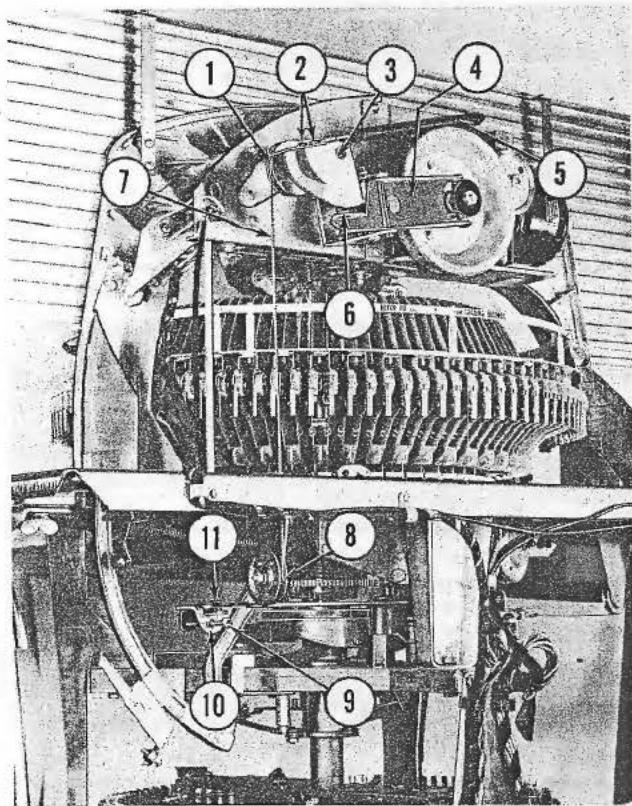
ACTUATING ARM AND CABLE ADJUSTMENT,
